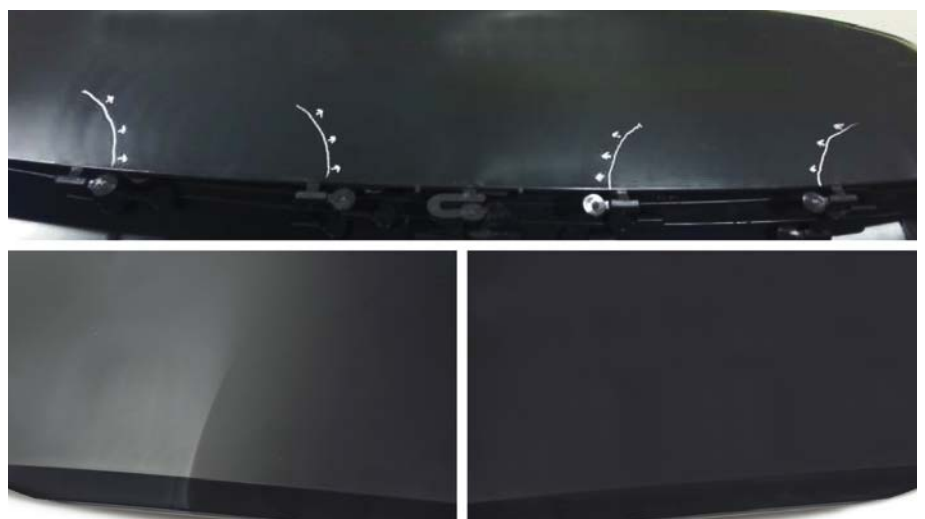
Position and typical profile of the pressure marks at the gating points in cascade injection molding (top); in the classic molding process they become clearly visible (bottom left) – with Flexflow, these defects do not occur (bottom right) (© HRSflow)
